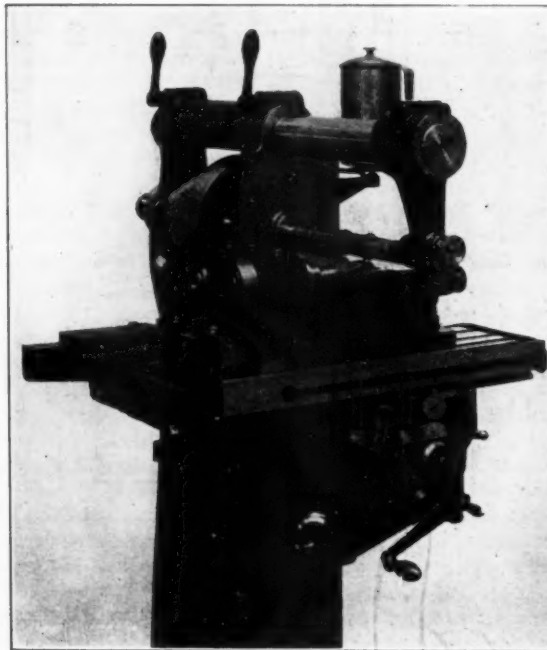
CUTTING 108 BRASS GEARS AT A SETTING ON A NO. 0 PLAIN MILLING MACHINE IN $5\frac{1}{2}$ SEC. EACH
